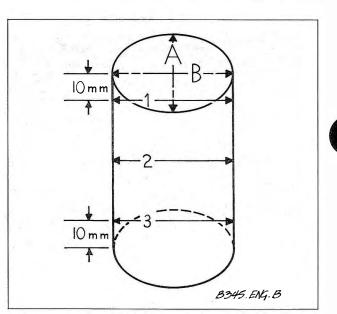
Cylinder bore measuring points. Top (1) and bottom
